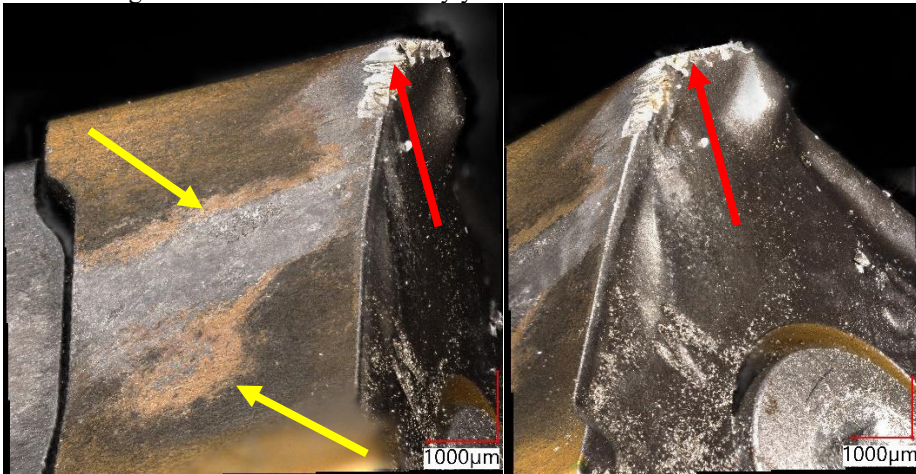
Main cutting edges and surfaces view of first insert, description in text.
